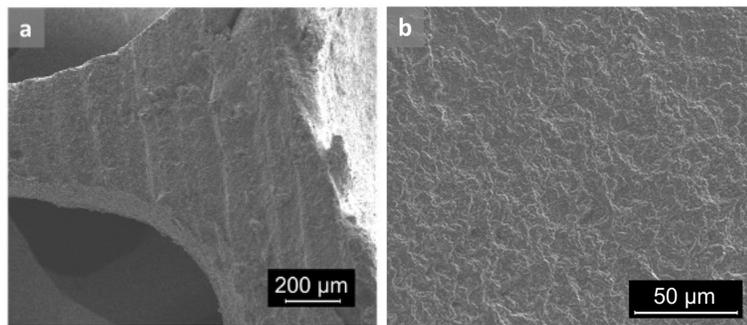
Details of ceramic foam surface after milling with aluminum oxide tools.
